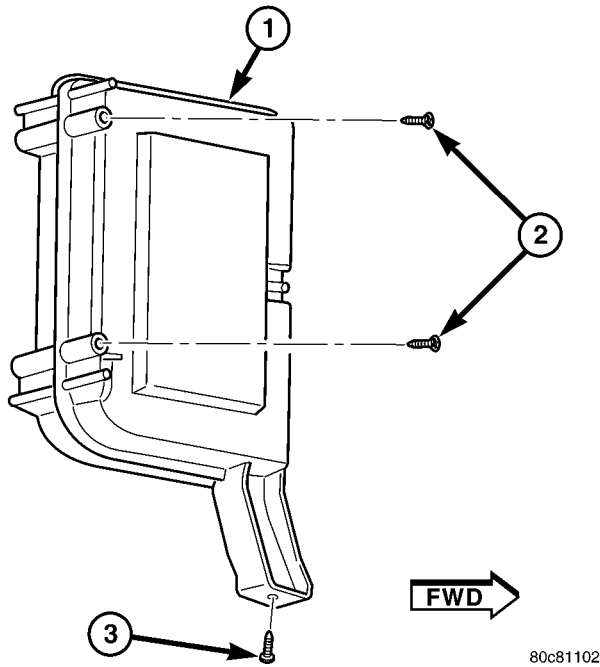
VACUUM RESERVOIR REMOVE/INSTALL
